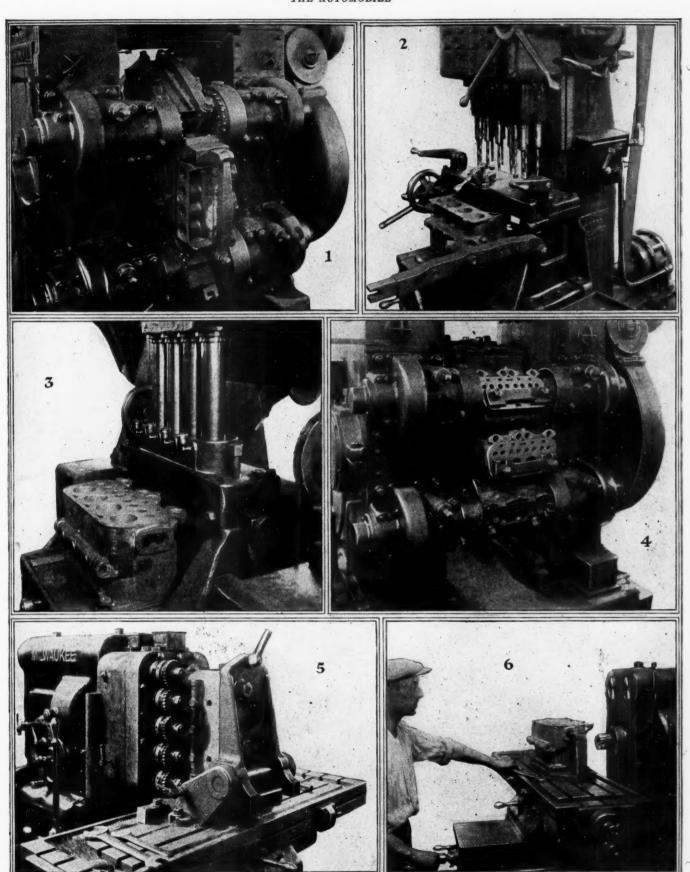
ingersoll continuous rotary miller which takes rough and finish cut from top and bottom face of block. Fig. 2—foote-Burt multiple spindle drill with twelve spindles which mills bottom flange and drills and reams the two dowel holes for locating the crankcase on the cylinder block. These dowel holes are used for locating practically all of the machine work on the block. The dowel spindles may be noted by the Magic quick-detachable chuck used for changing over to the reamers for these holes. Fig. 3—Foote-Burt machine for rough boring cylinder block. This machine takes about ½ in. off the bore and operates at the rate of 20 blocks per hr. Fig. 4—ingersoll rotary miller for milling both ends of the block. Miller has both rough and finish cutters. Fig. 5—Milwaukee 3B miller which mills the intake manifold flange on all cylinder blocks. Fig. 6—Milwaukee miller for milling eight bolt hole faces and soot facing two bolt hole faces on Olds blocks. Note location on these operations, which is from dowel holes in bottom of blocks, the work being secured by clamps in the water outlet hole
